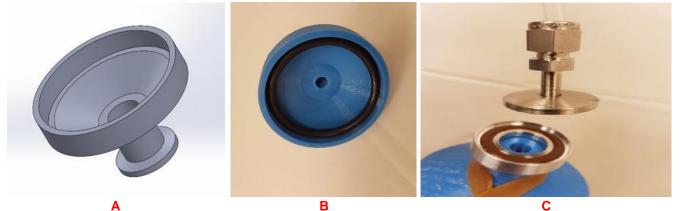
SKC 226-129 sampling holder – A) 3D design, B) 3D printed holder with O-ring, and C) connections from holder to sampling tubing.
